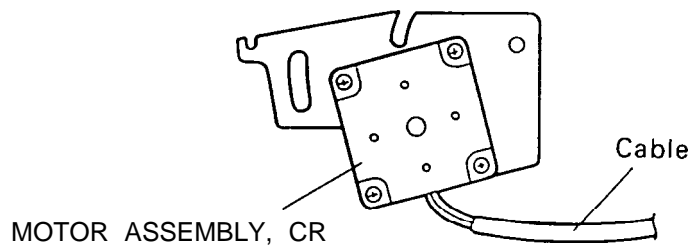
Positioning the MOTOR ASSEMBLY, CR
